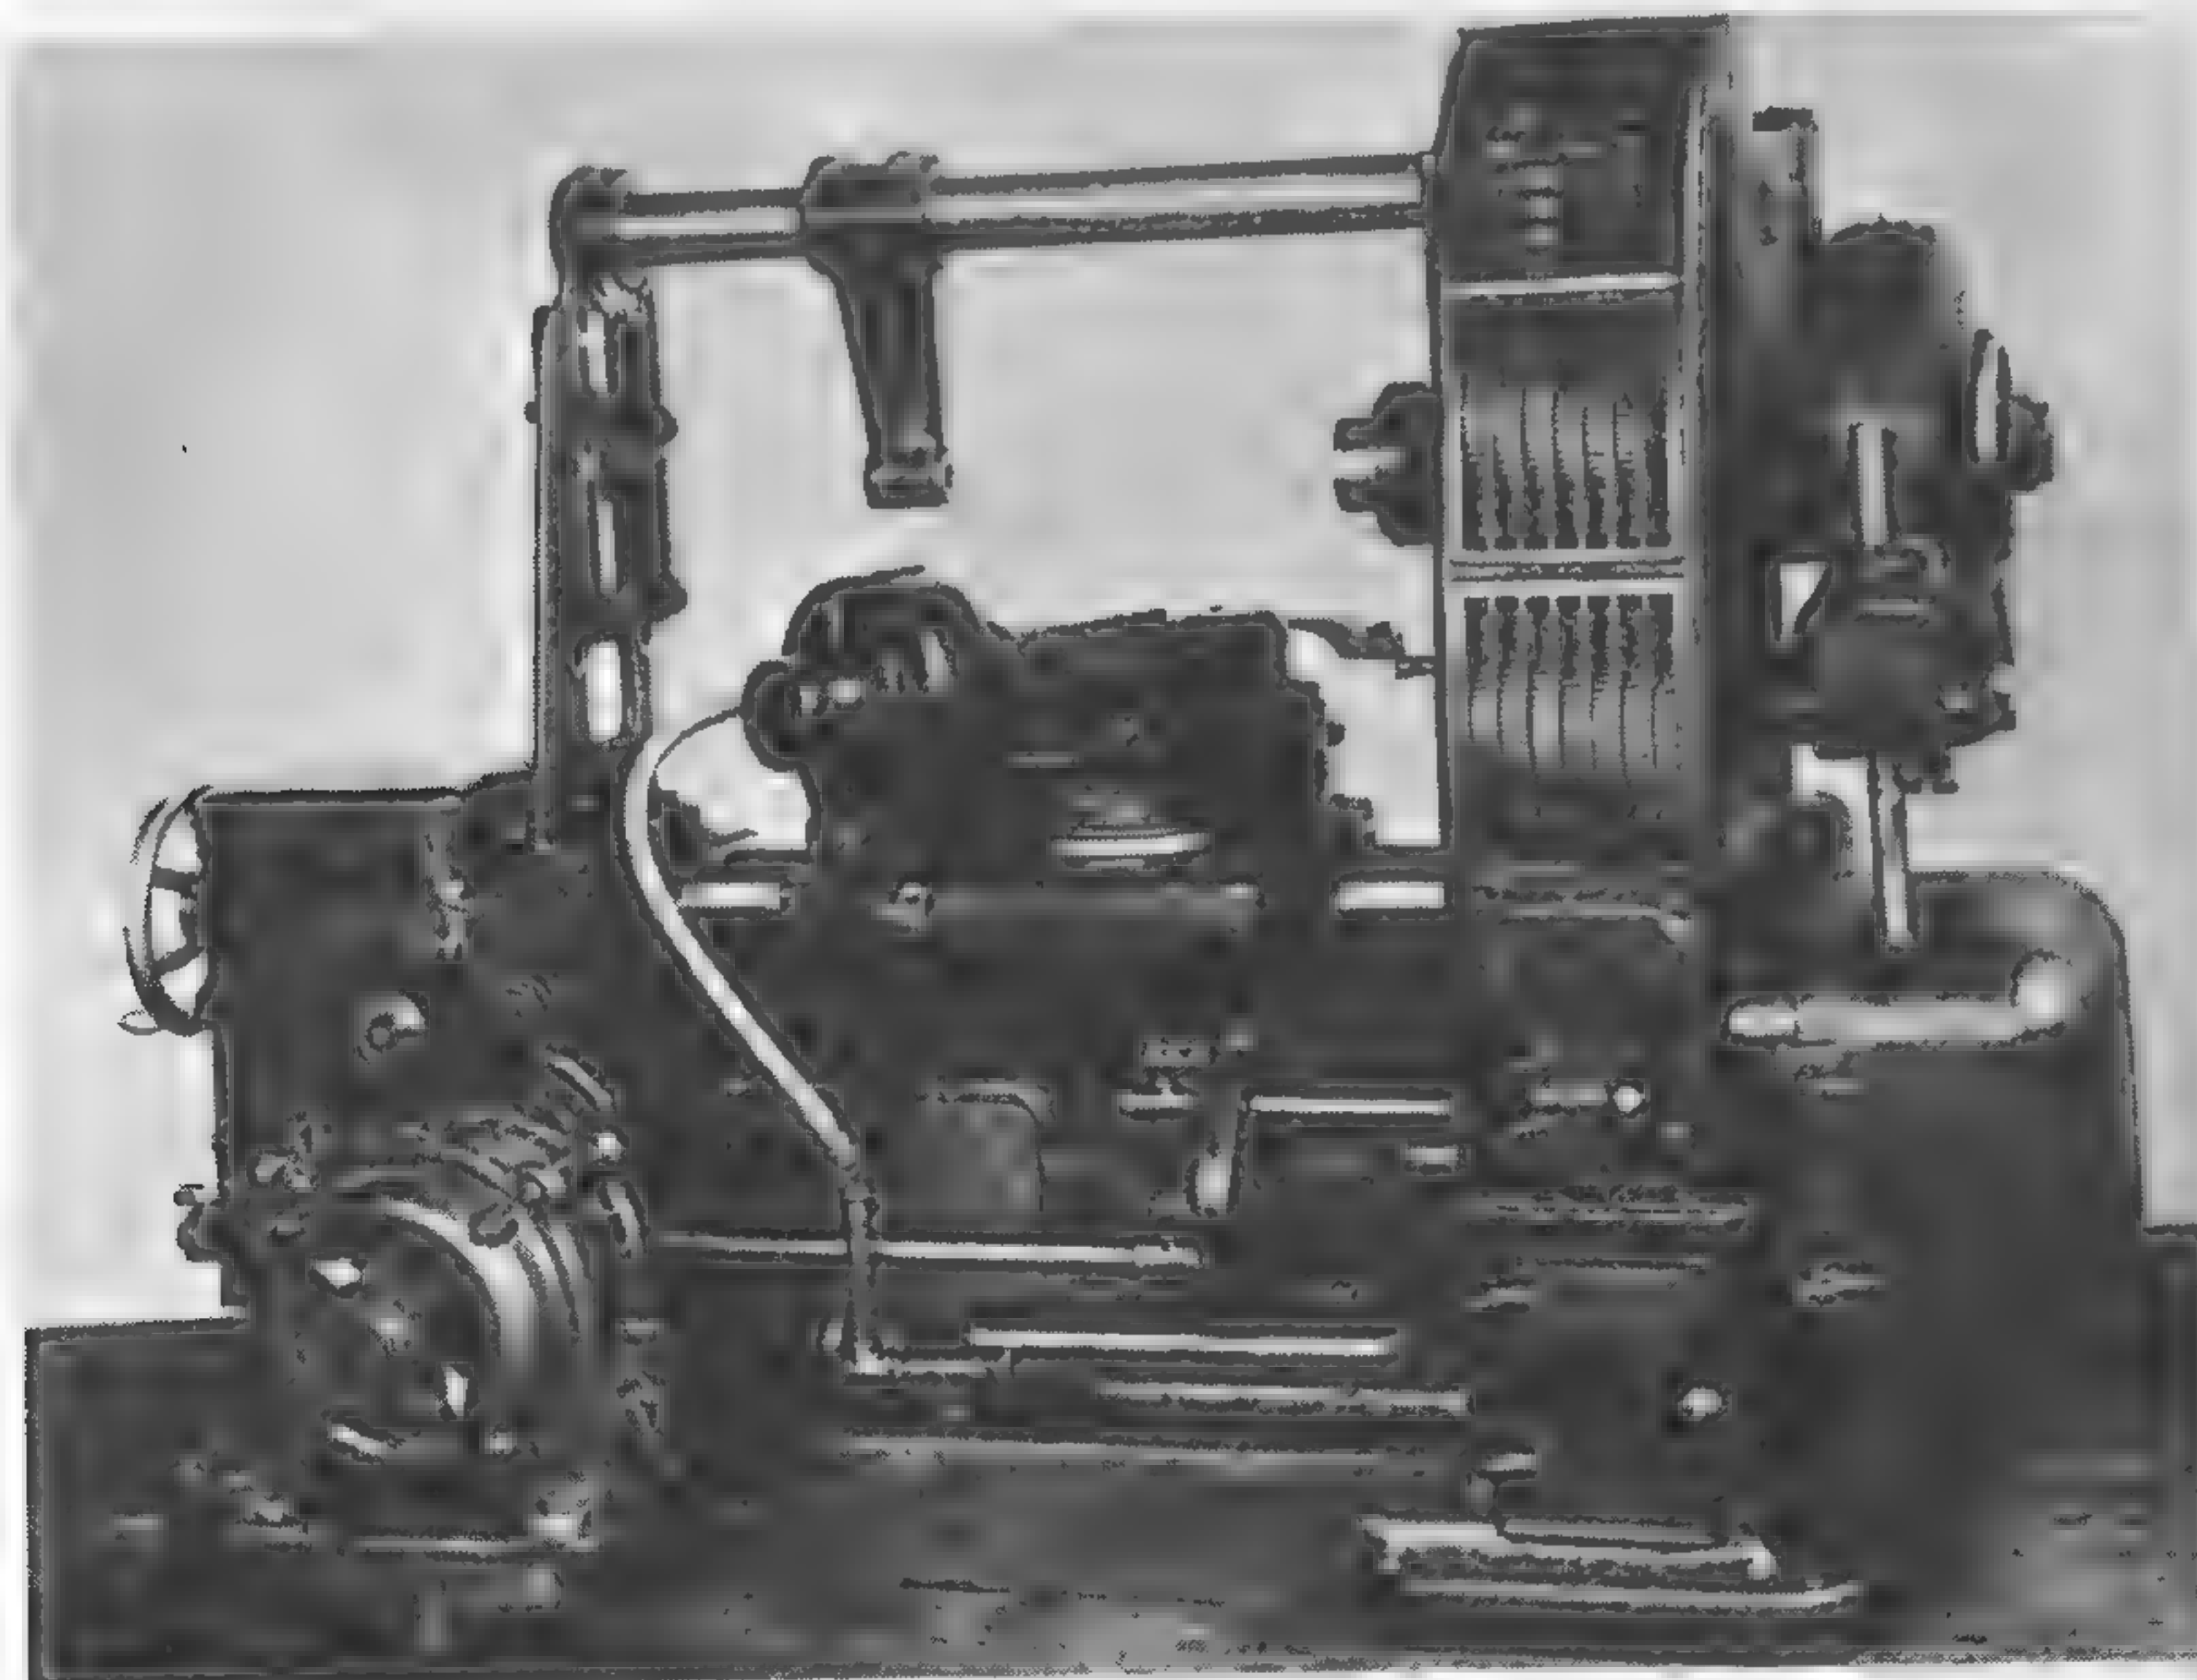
BROWN & SHARPE GEAR HOBBER, 1915 (*Brown & Sharpe*)
